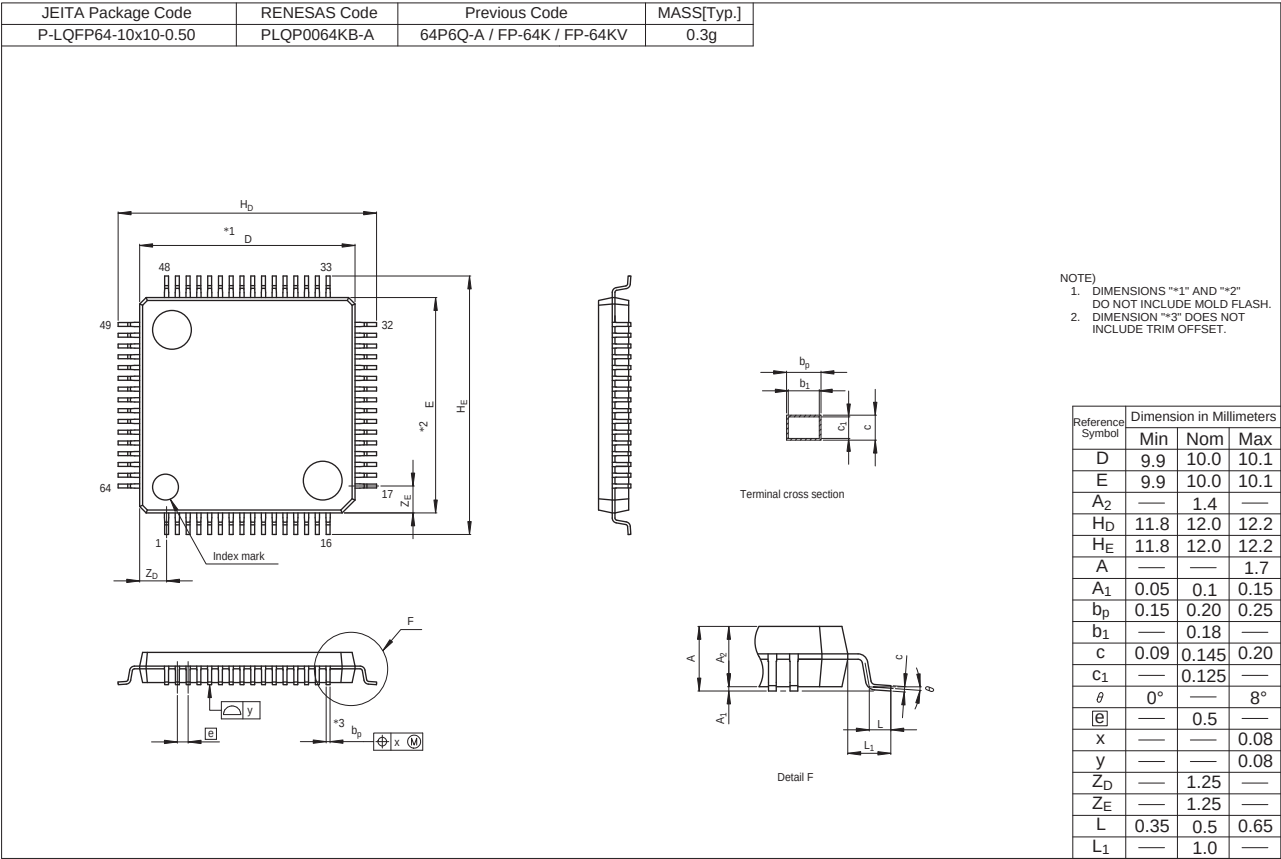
Pin LQFP (PLQP0064KB-A) Package Dimensions
